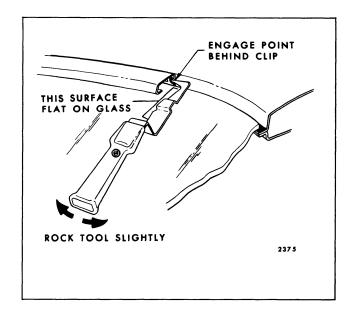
Usage of Reveal Molding Removal Tool (Handle J–21544–1 and Reveal Molding Remover J–21549–5 Shown. Others Similar)
